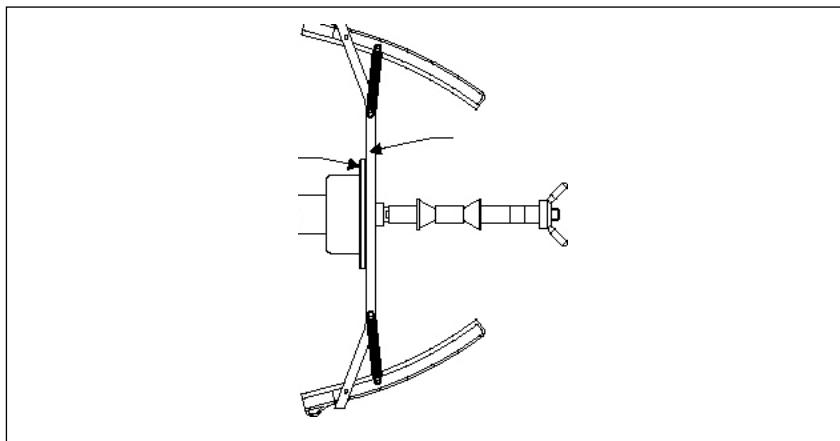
Arranging the motorcycle tire fixture on the balance shaft. Align the threaded fixing holes on the fixture with the fixing holes on the balance shaft.
